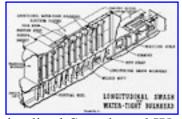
Longitudinal Swash and Watertight Bulkhead
